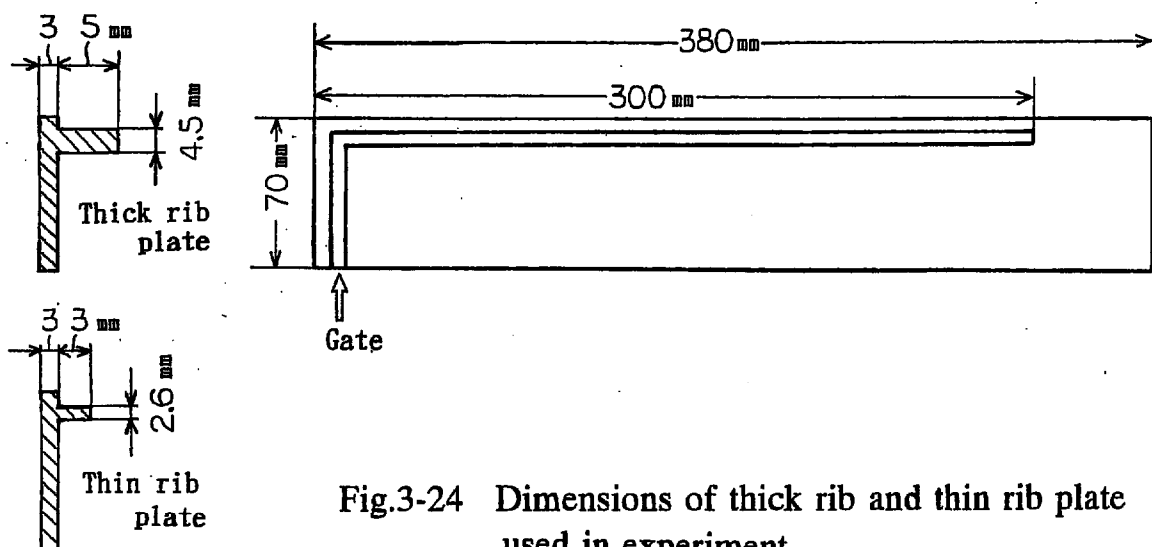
Dimensions of thick rib and thin rib plate used in experiment.
